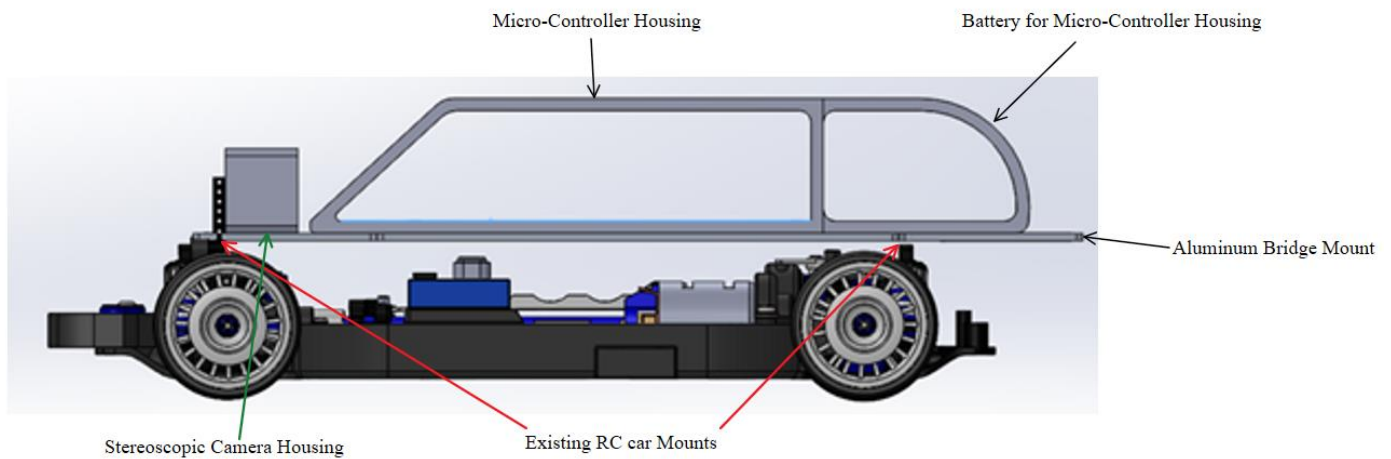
A side view of our intended final design for the additions for the RC car. Note this CAD model is not to scale as the RC car used in the CAD model is not the RC car that we are using, but a similar one that is slightly shorter
